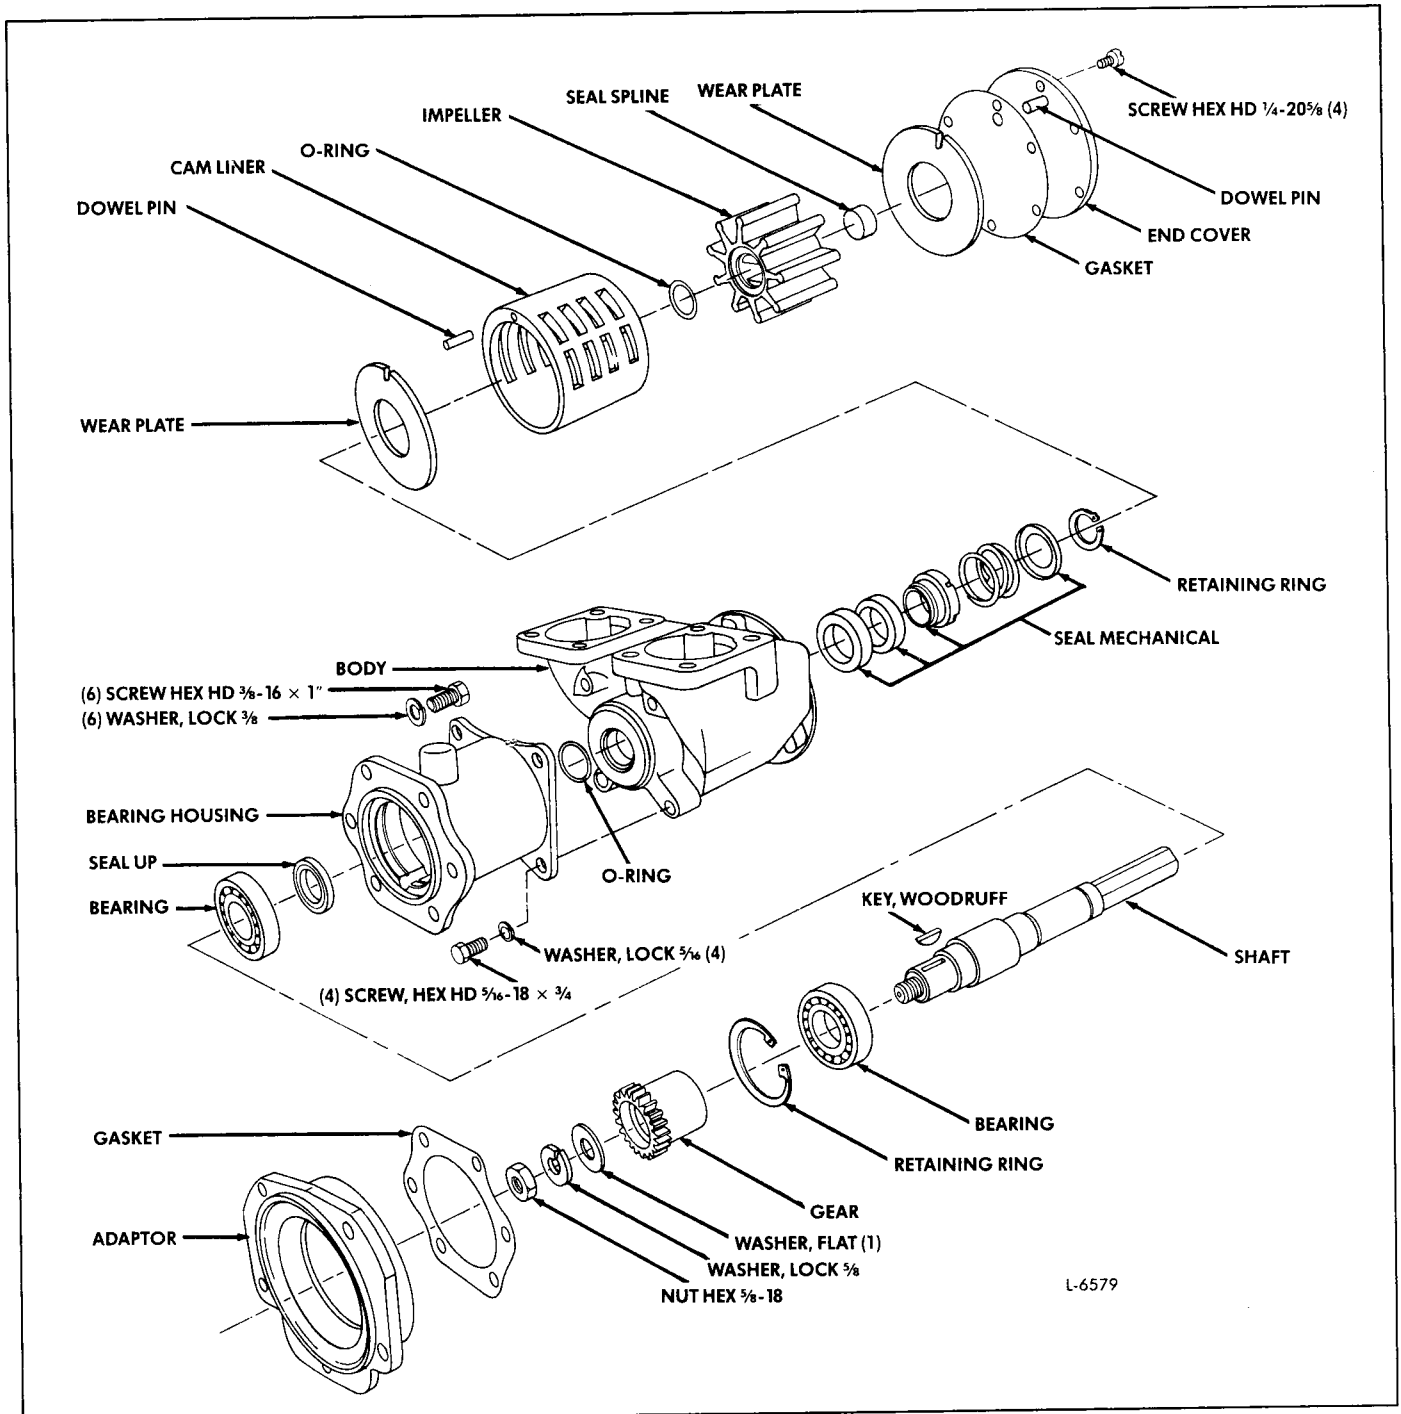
Raw Water Pump Details and Relative Location of Parts (Polyurethane Cam/Liner Design)
